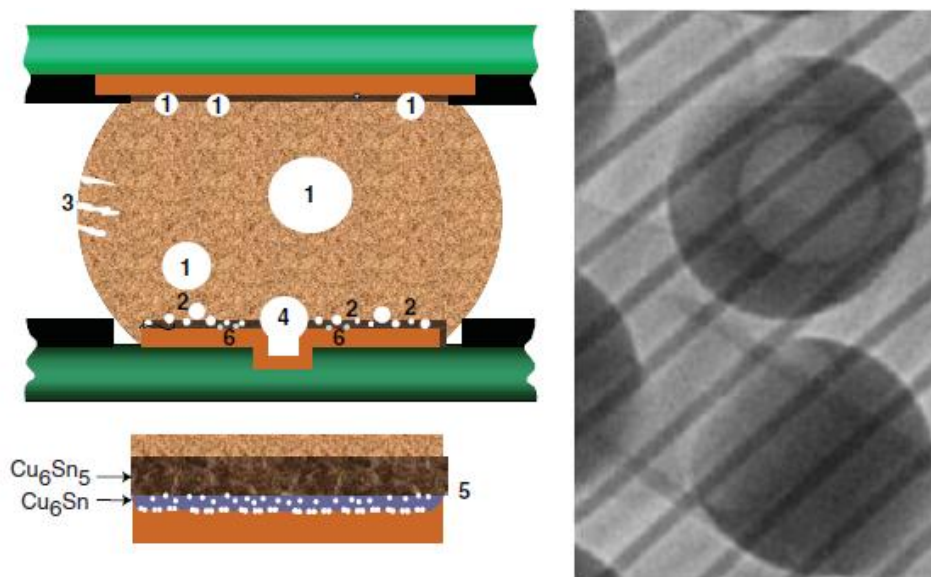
FBGA Solder Joint after Reflow Soldering and Macrovoid
